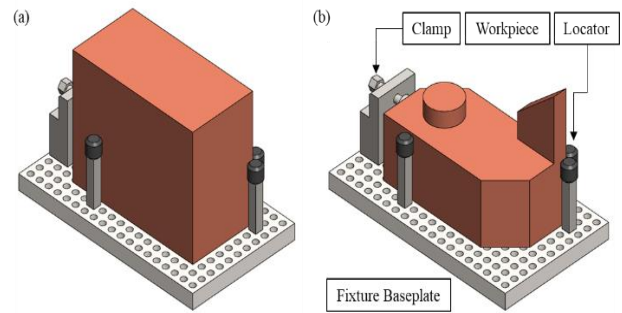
Generated fixture (a) Raw workpiece prior to machining. (b) Machined top surface of workpiece after intermediate machining processes
